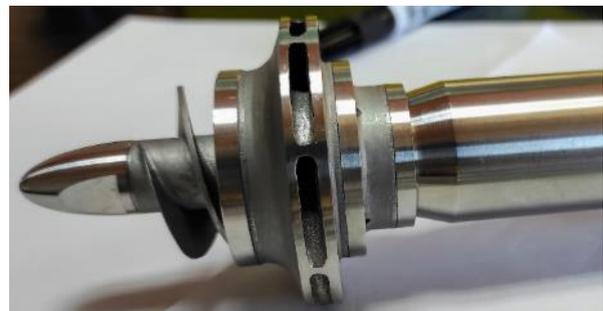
Pump after machining at the shaft with the pump nut installed.
